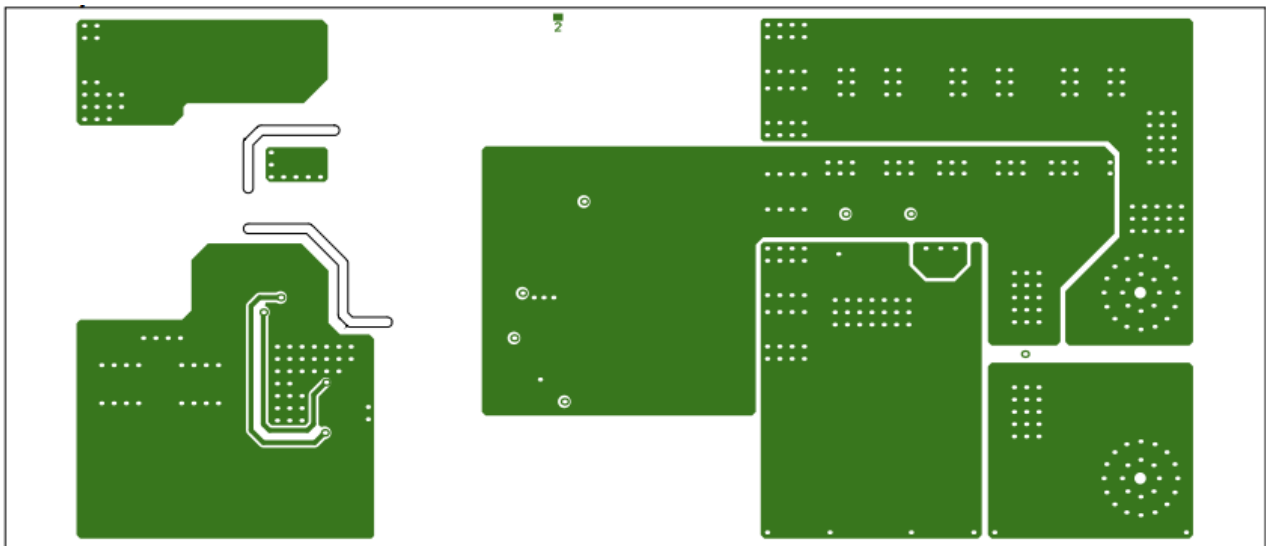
DER-952Q Mid-Layer 2 PCB Layout.
